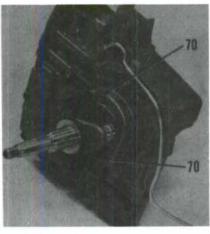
View showing crankcase removed from drivecase and crankshaft on models equipped with ball bearing at drive end of crankshaft. To remove crankshaft from drivecase, bearing retaining screws (70) must first be removed.
